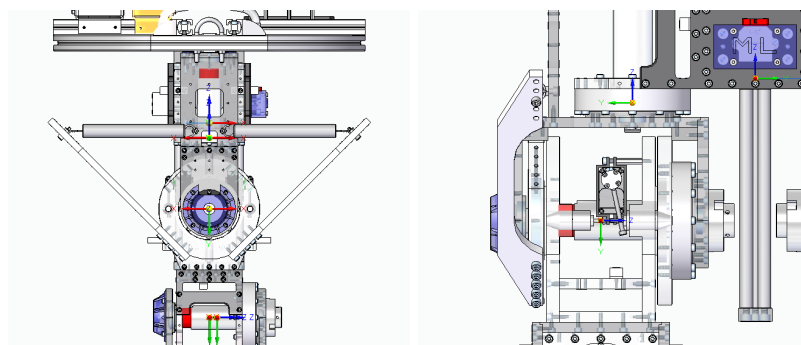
Left image shows the side of detachable spring mechanism, and right image shows the front view of the mechanism.
